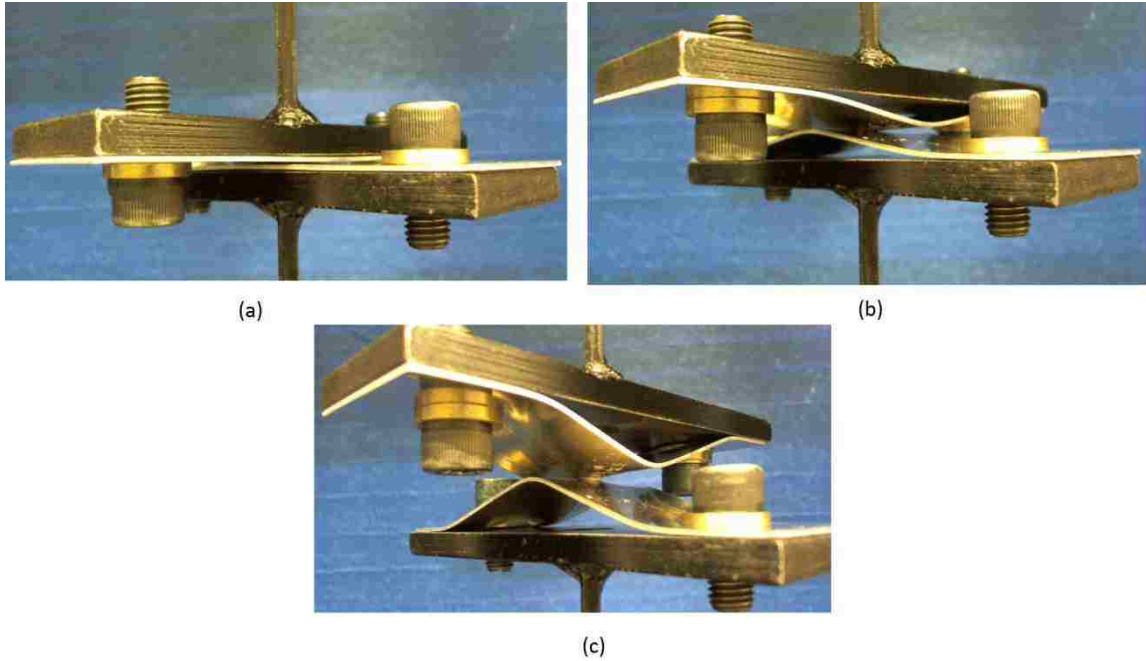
Tensile test of a 1.3 mm thick RSW cross tension joint, No adhesive; un-deformed shape (a), progressive deformation of the coupons (b) until nugget pull-out and final failure (c).
